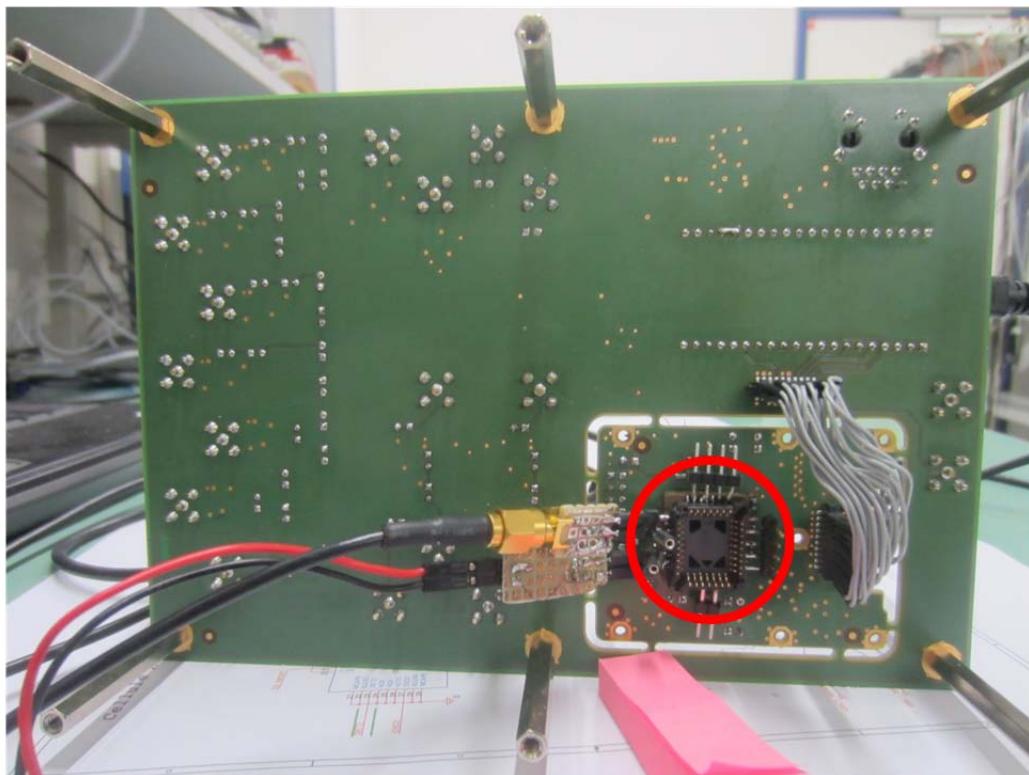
PCB backside with the socket for the Thales accelerometer cell
